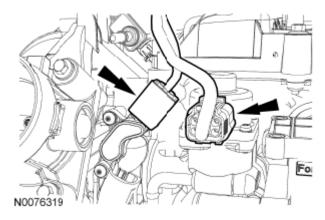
Locating Oil Level Indicator Tube And Bolt Courtesy of FORD MOTOR CO.
